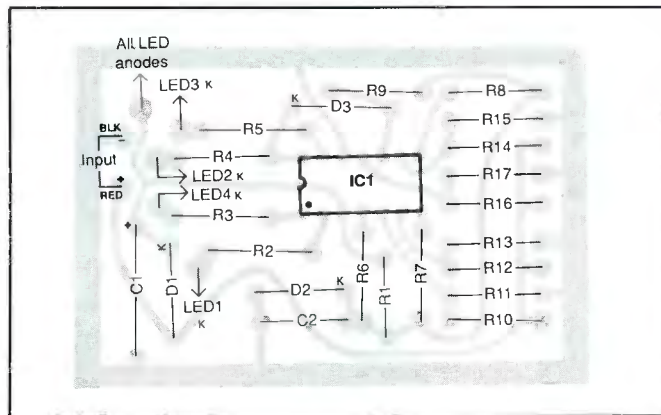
Wiring diagram for pc board. Use this as a rough guide to component placement when wiring the project on perforated board.
